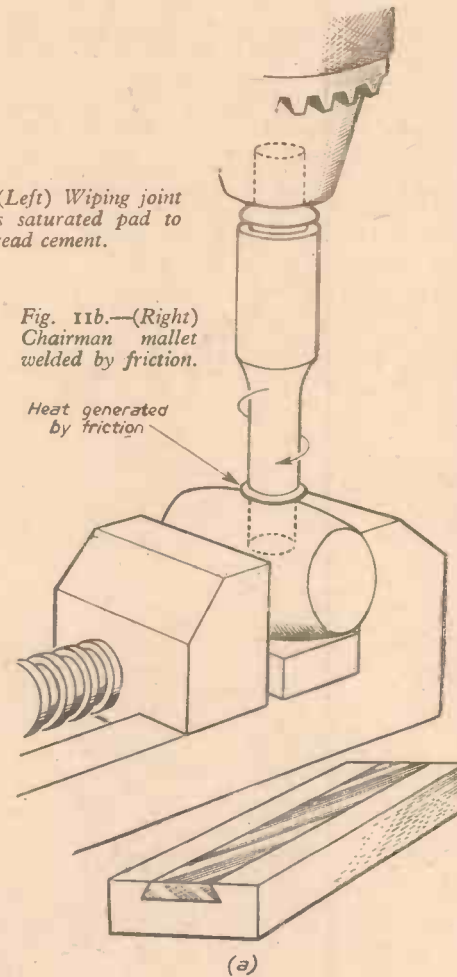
(Right) Chairman mallet welded by friction.
